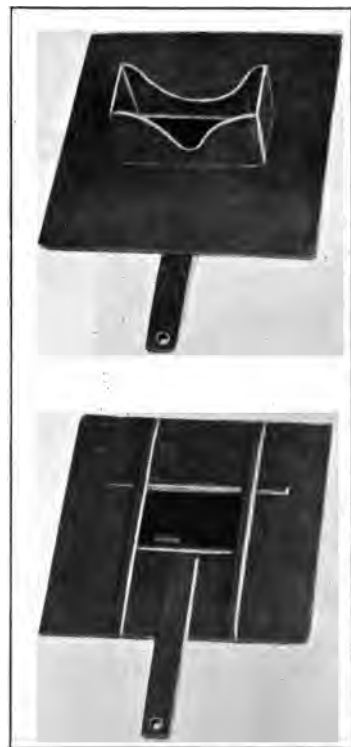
WELDER'S HAND SHIELD.
